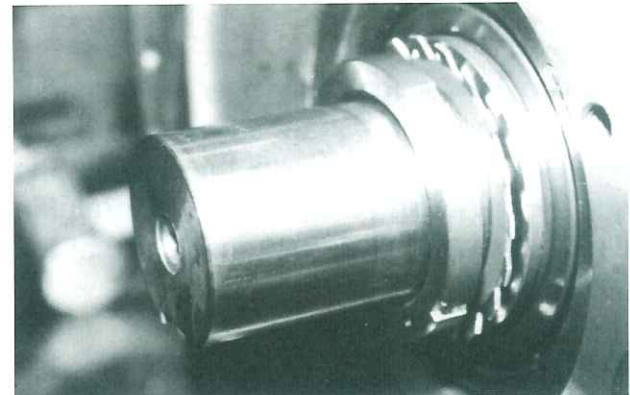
Mounting and Securing Thrust Bearing Inner Ring
